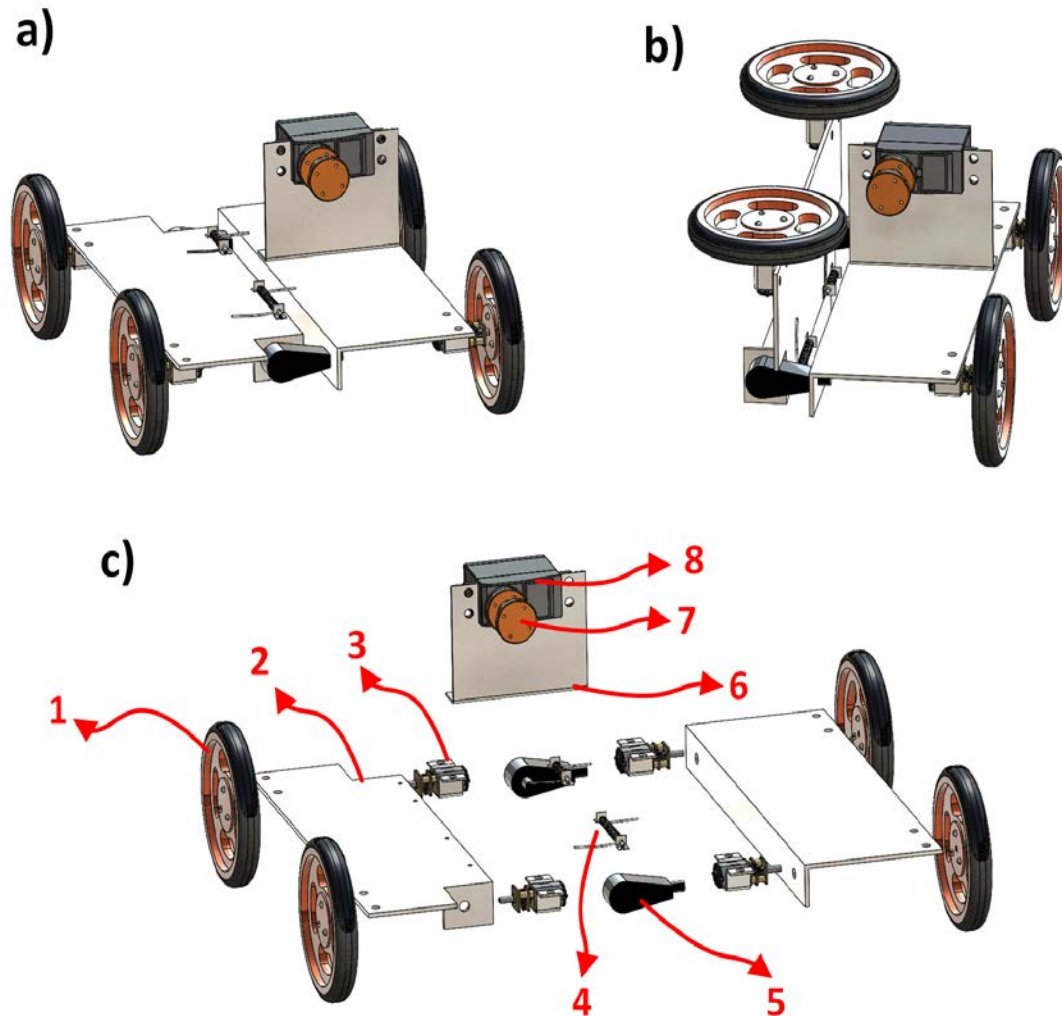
Structural design of the foldable mobile robot. a) General view, b) View of the folded condition, c) Components of the foldable mobile robot: 1- Wheels, 2- Chassis, 3- DC Motors, 4- Torsional spring, 5- Revolute joint, 6- Rigid support, 7- Pulley, 8- Servo motor.
